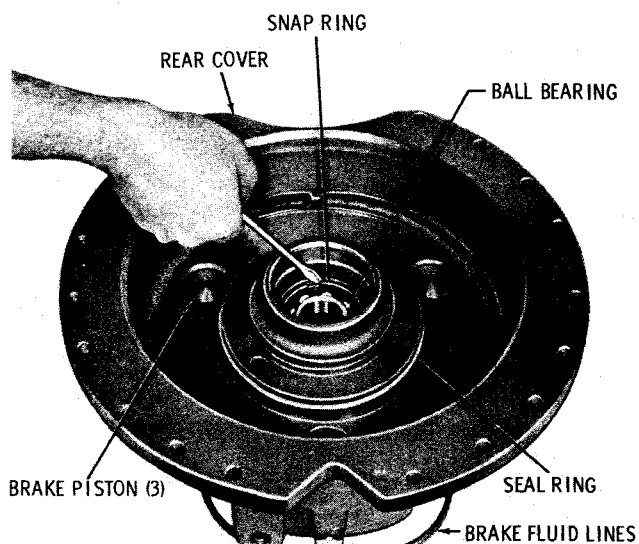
Removing snapring from TTB model rear bearing bore
